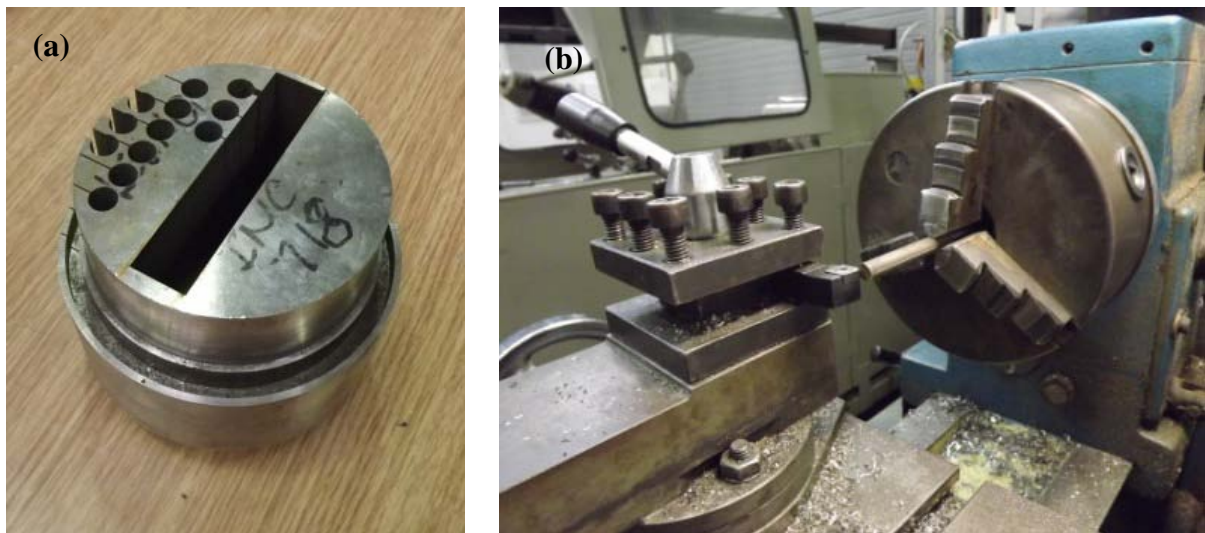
(a) Shafts obtained following a WEDM operation from a bar of Inconel 718, (b) Turning of a shaft to achieve a final diameter of $6\pm 0.02\text{mm}$.
